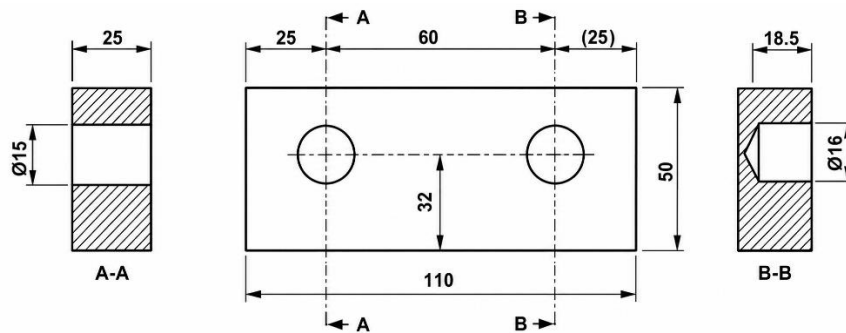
Example of sectional views illustrating a through hole and a countersunk hole
